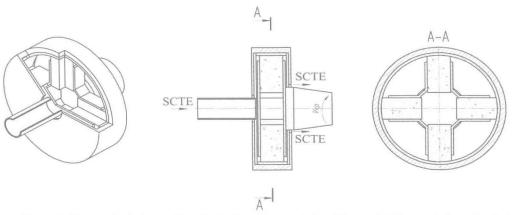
The method of centrifugal grinding with the help of the tool with prefabricated radial sliding abrasive segments
